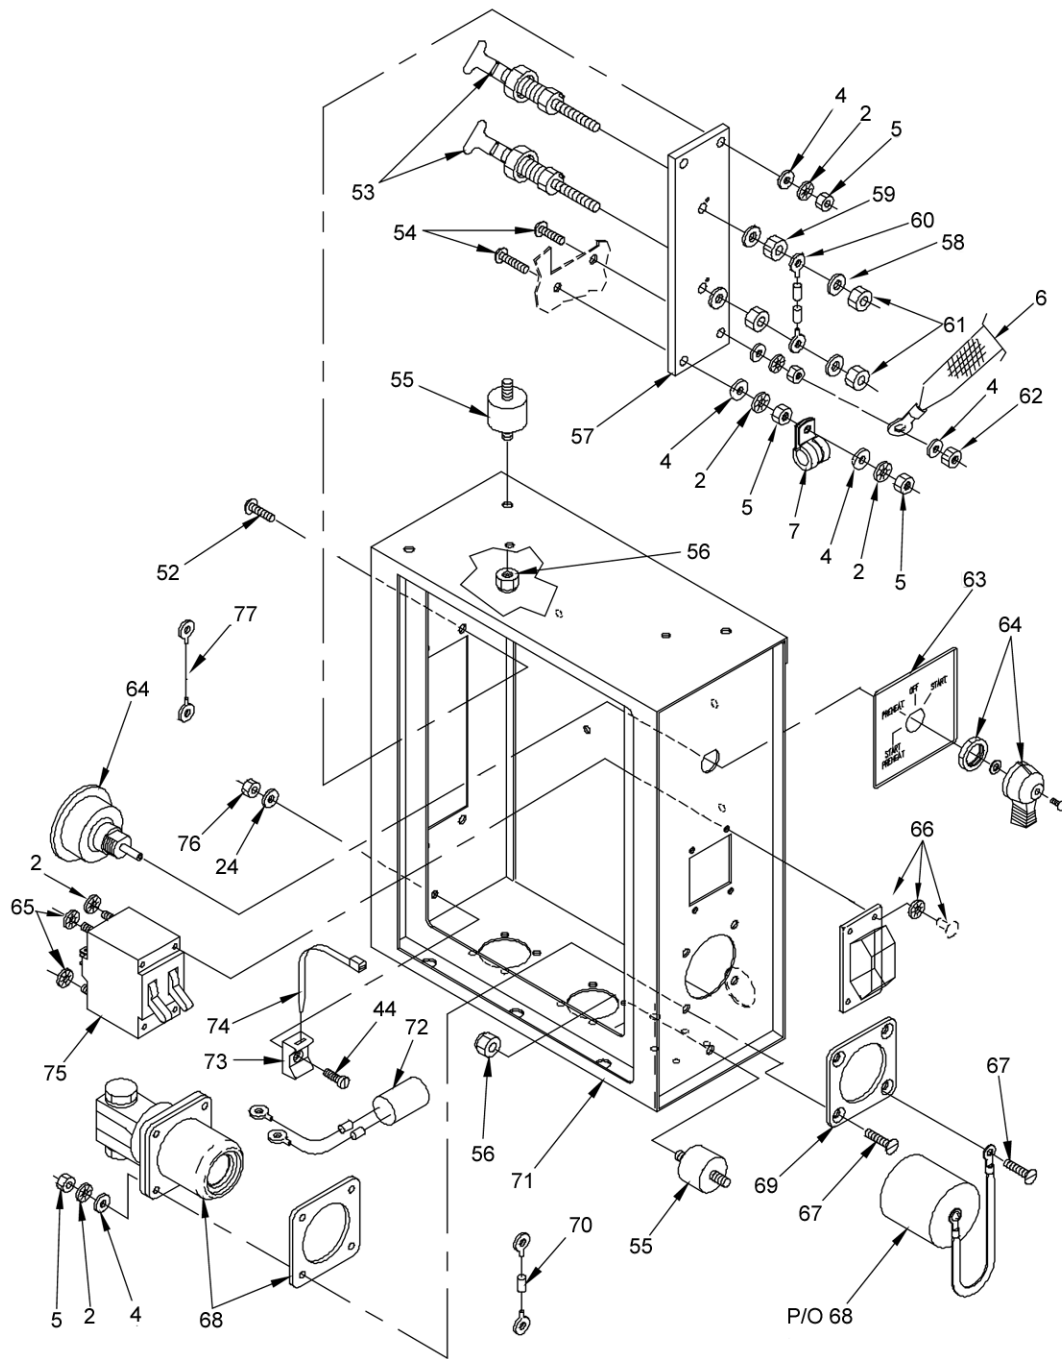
Control Panel Assembly (MEP-501A) (Sheet 3 of 3).
